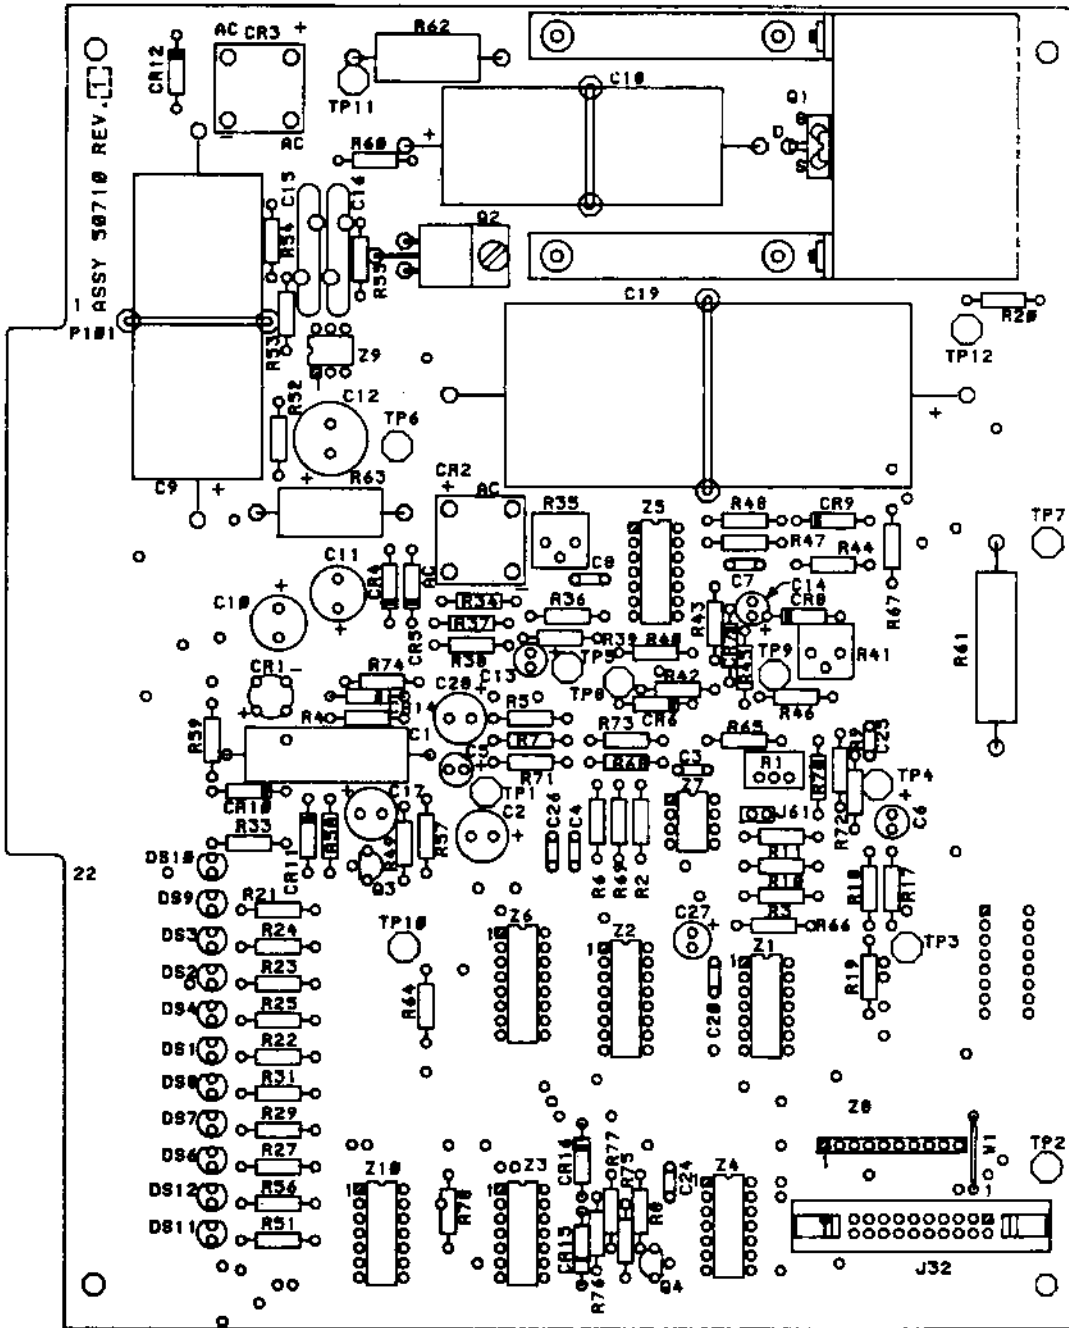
High Voltage Interface Printed Circuit Board Component Locations, (50710-1)
